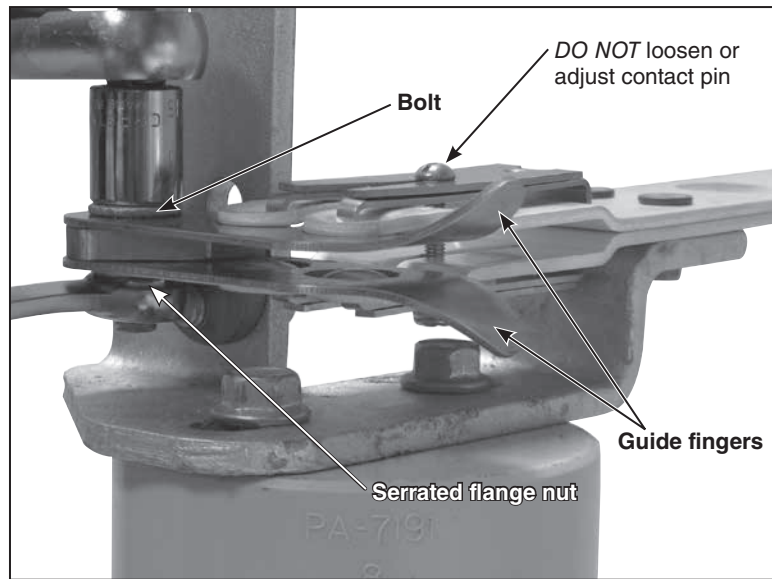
Remove the serrated flange nut securing the guide fingers to the mounting bracket.
